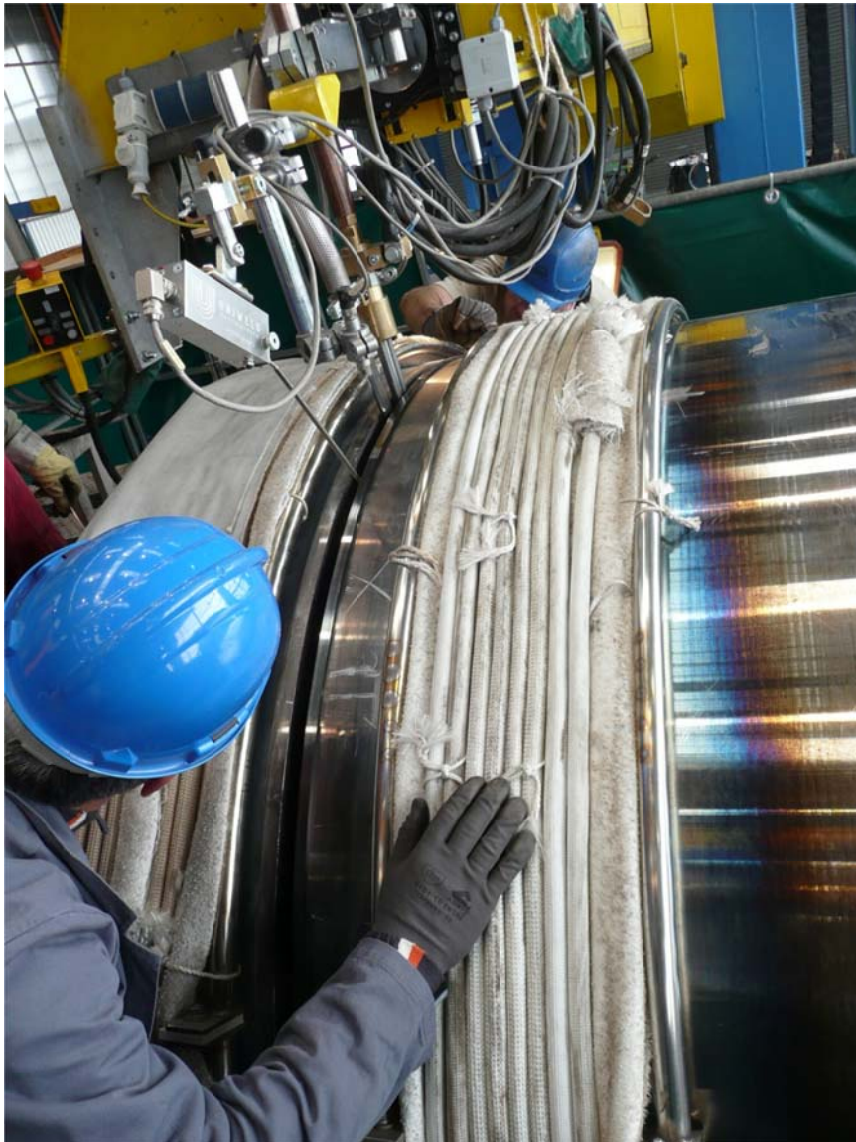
TN[®]24E bottom to shell welding (courtesy of AREVA TN)
